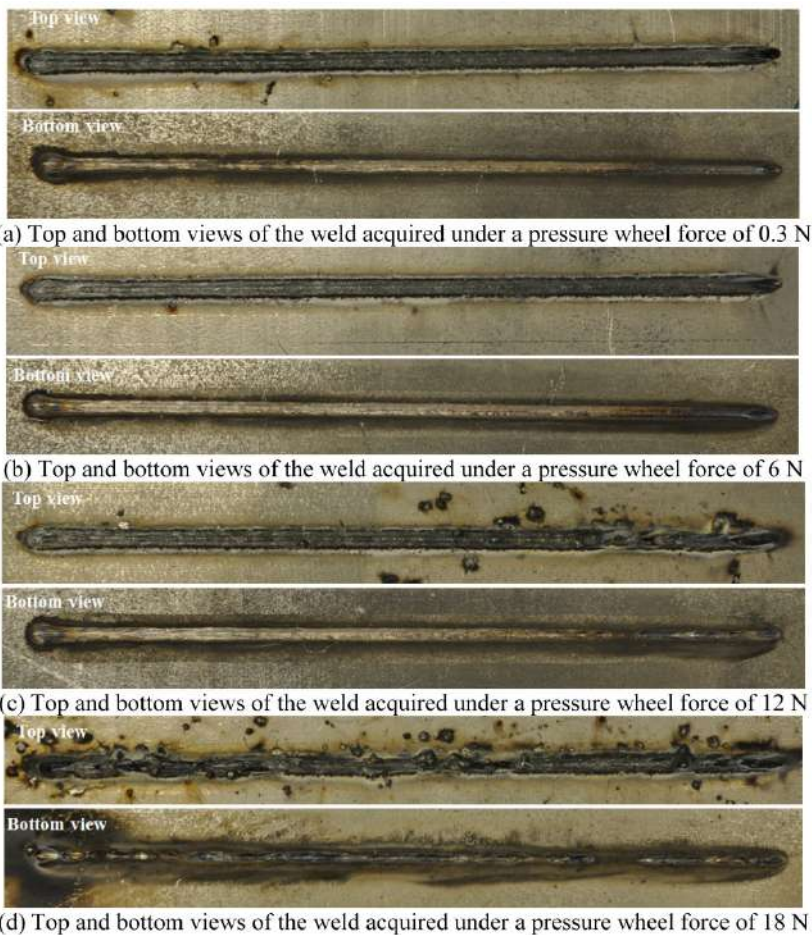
Top and bottom views of the welds acquired by various pressure wheel forces under a laser power of 4.0 kW and a welding speed of 50 mm/s
